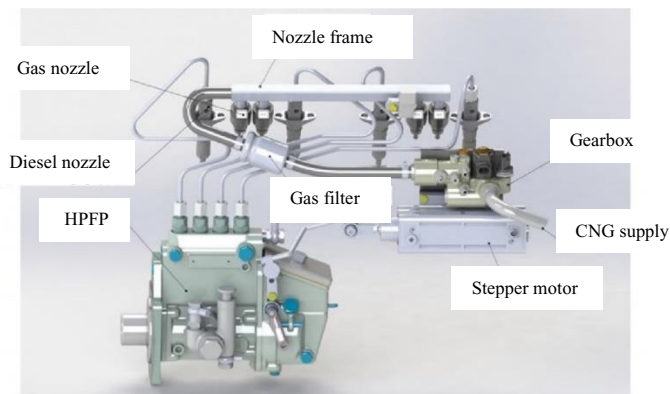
Fuel equipment of gas-diesel engine GD-243 [10]
